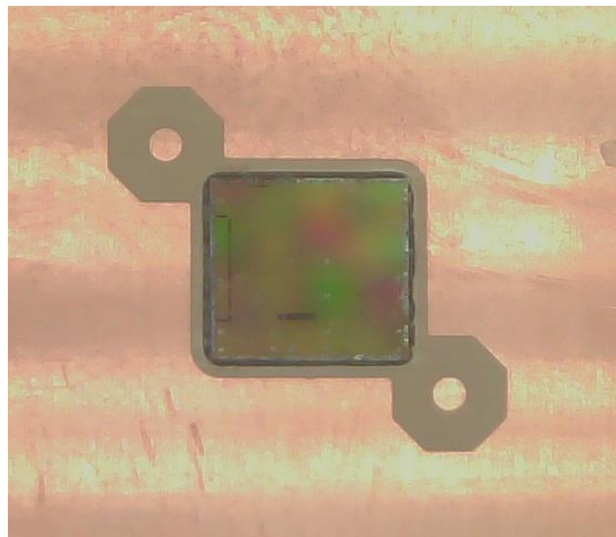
Image acquired for inspection of gap between bare die and PCB (cropped).
